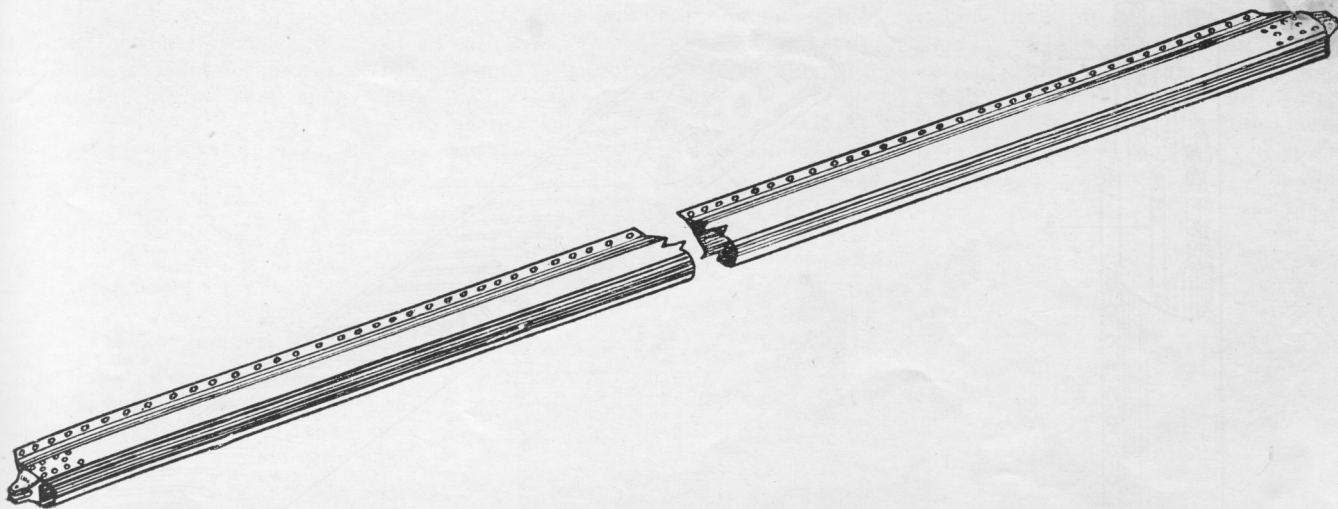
The wing brace strut is a single sheet turned on itself and joined on an automatic riveting machine along outwardly faced flanges at the T.E. Extruded fittings at the ends serve for attachment to the hull and the wing, respectively.
